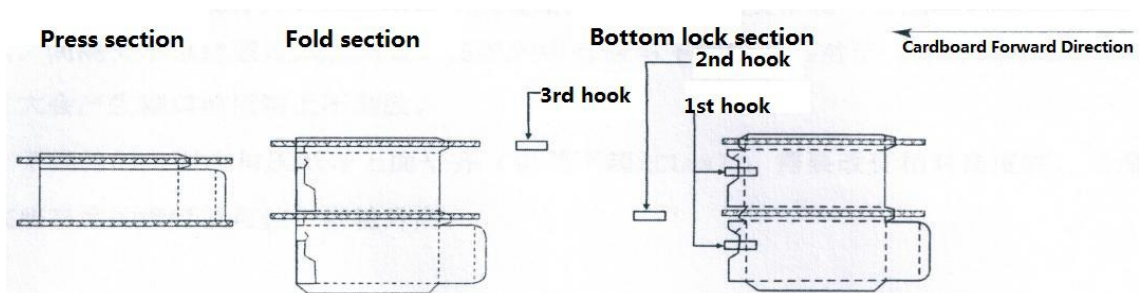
Installation of bottom lock spare parts of 2 group guide board
